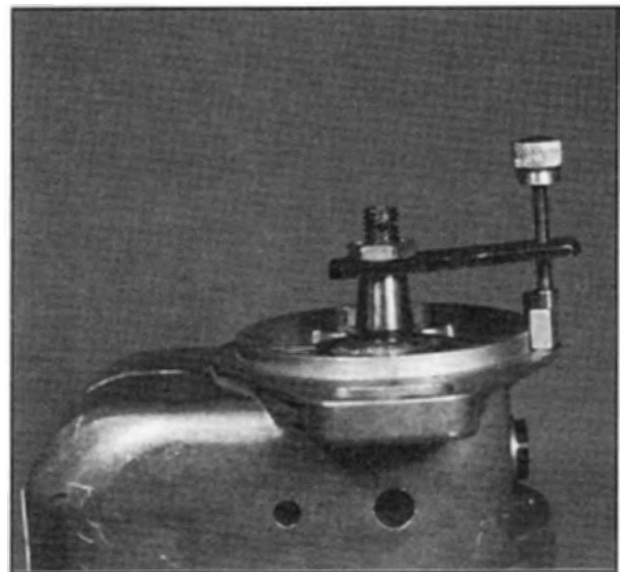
A Bendix magneto holding tool holds the magnet at the correct E-gap angle.
